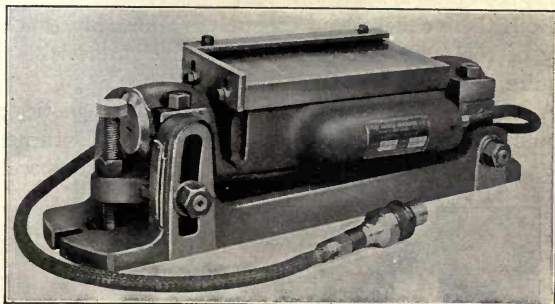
Heald magnetic chuck with adjustable taper base.
